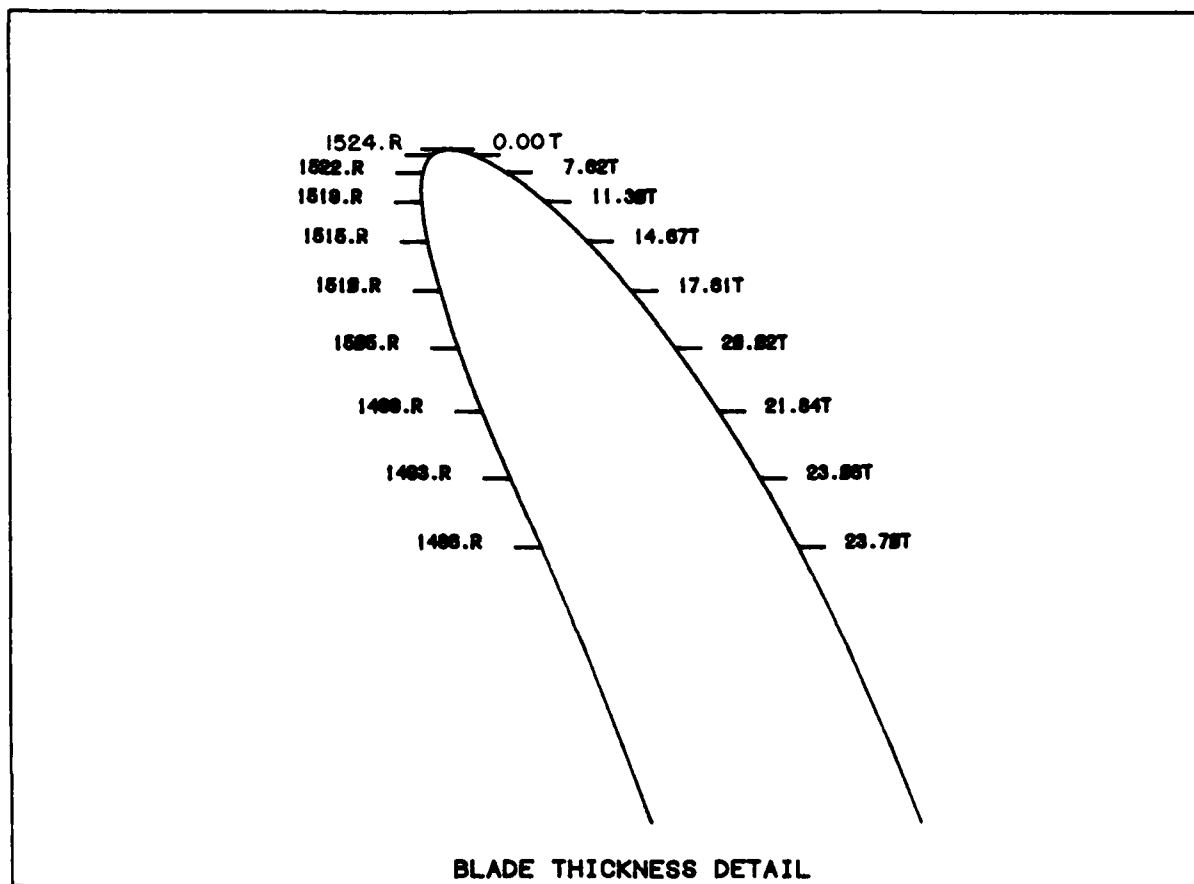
ENLARGED VIEW OF BLADE THICKNESS AT TIP OF NSMB 5363 PROPELLER BLADE
